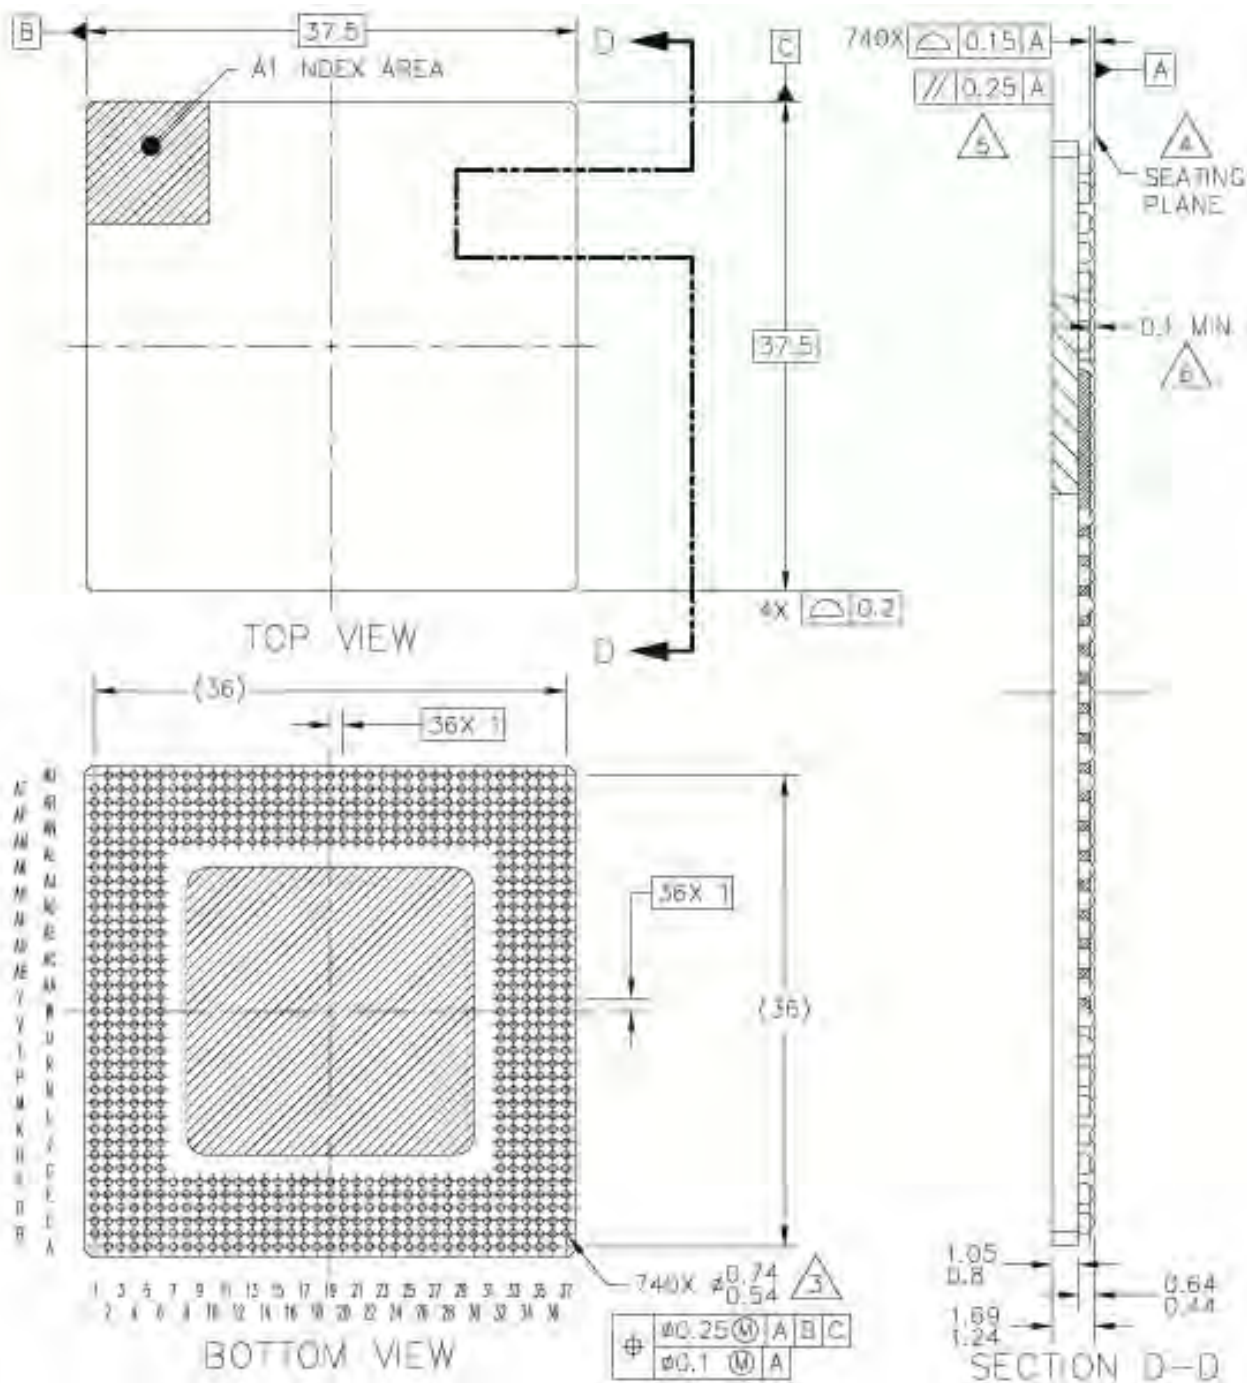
Mechanical Dimensions and Bottom Surface Nomenclature of the TBGA Package
